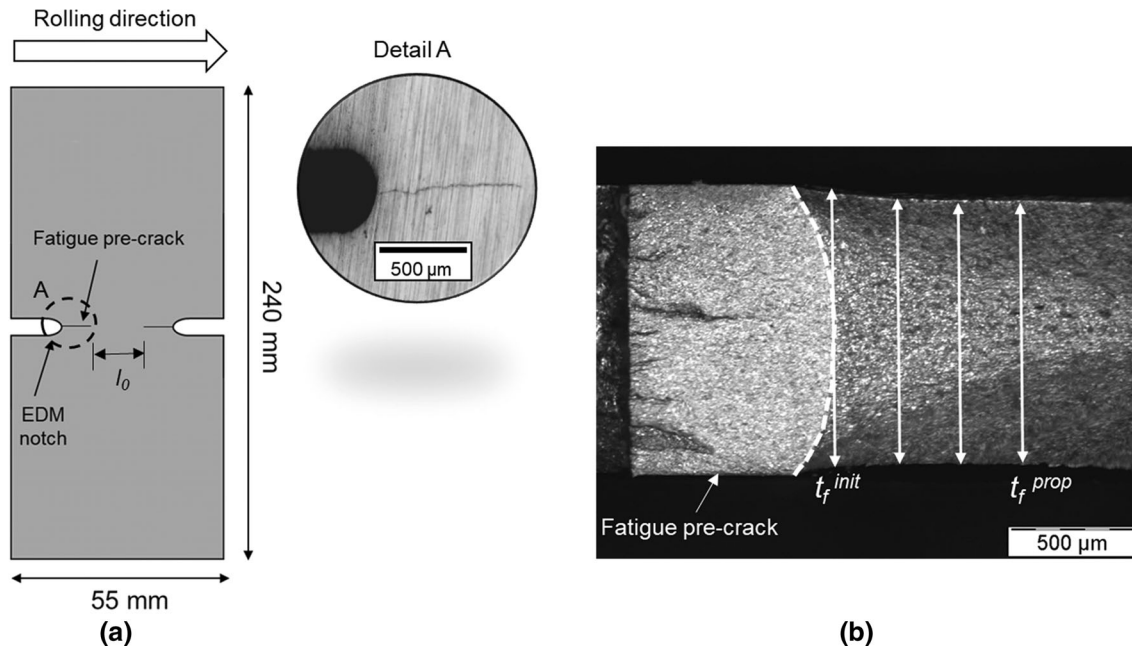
(a) DENT specimen used for EWF tests and detail of the fatigue pre-crack at the notch root. (b) Fracture surface of a DENT specimen and location of the different thickness measurements. The dashed line indicates the crack tip.
